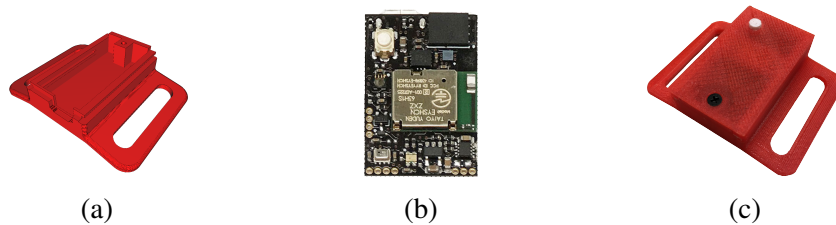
(a) CAD model of open case; (b) MetamotionR development board; (c) Final printed case assembly.
